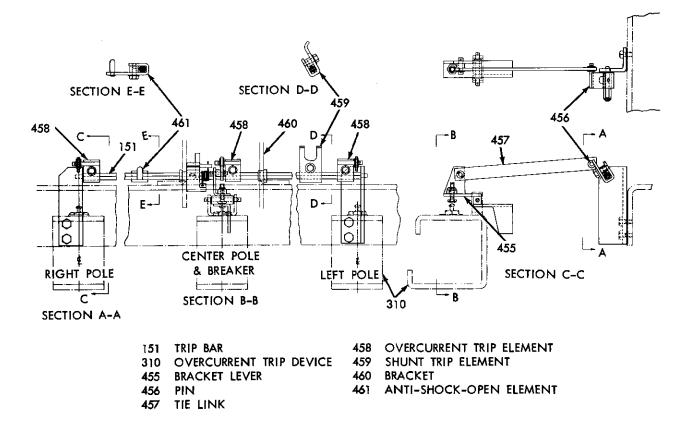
Trip Bar and Tripping Attachments
